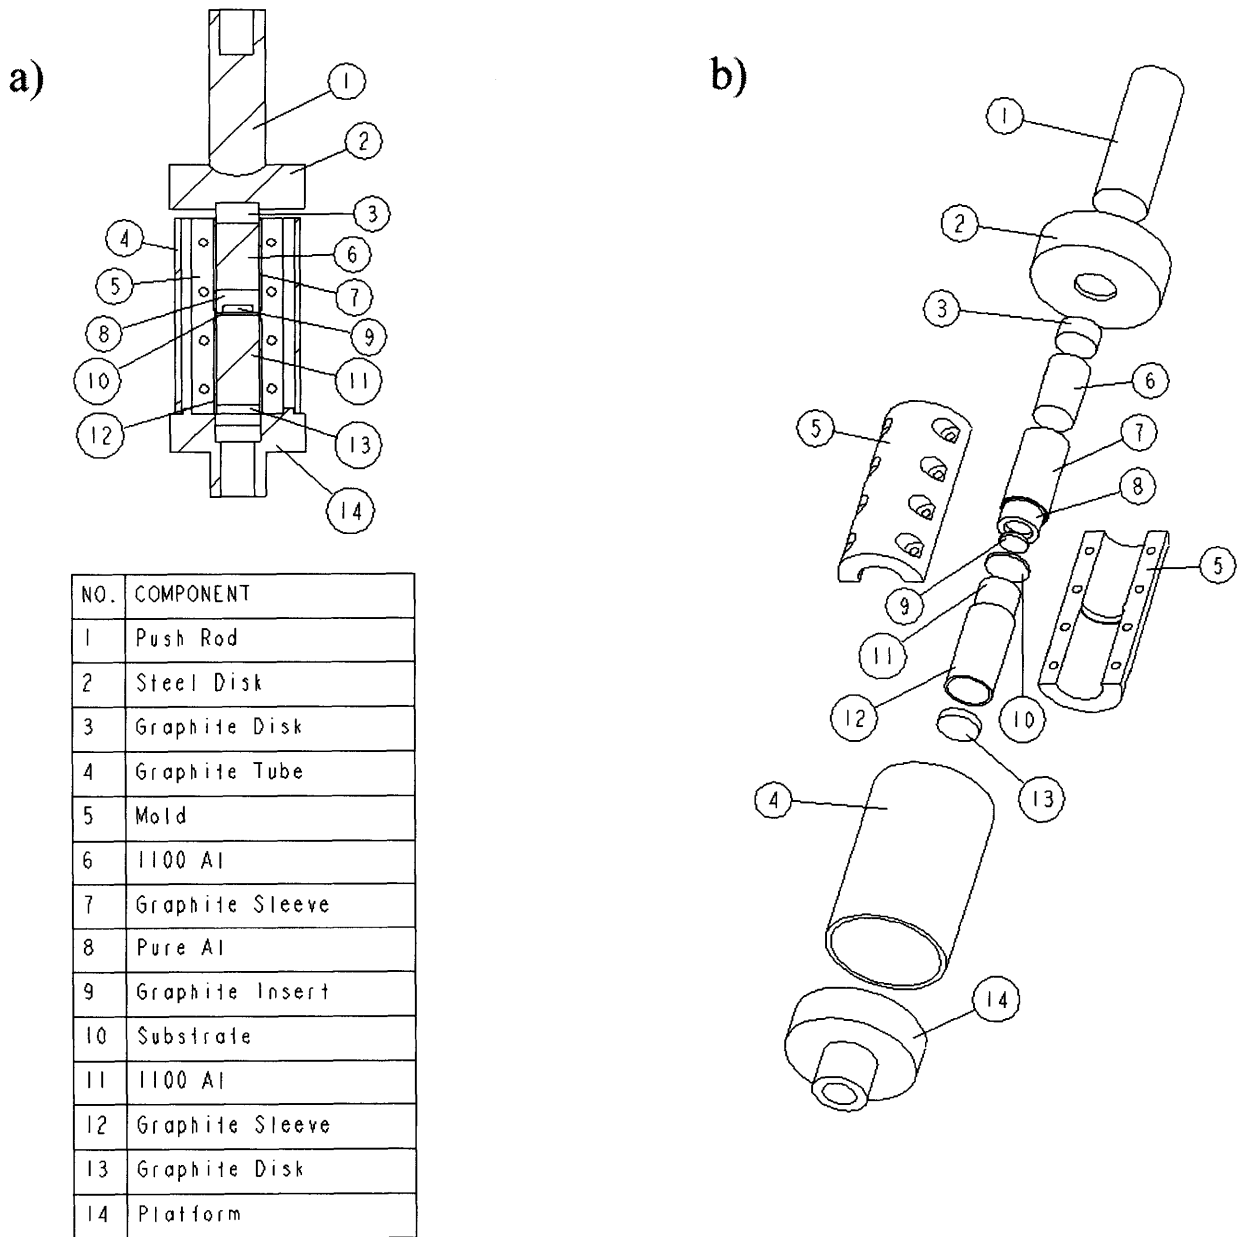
Diffusion bonding setup: (a) section view of assembly; (b) exploded view of assembly.
